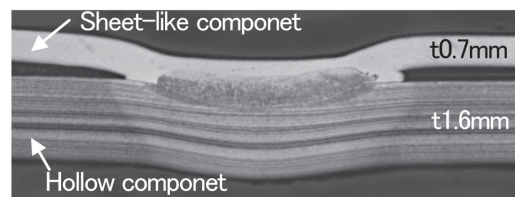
Cross section of indirect spot weld for hollow and sheet-like components
